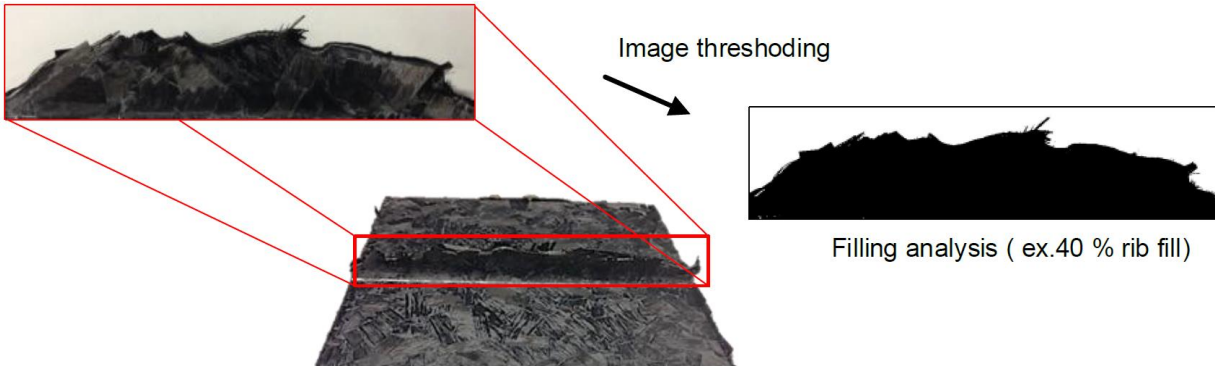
Image thresholding technique used to measure percent rib filling [90].
